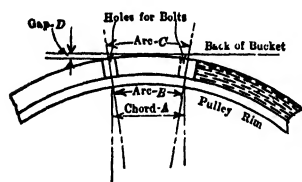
Double Row of Bucket Bolts Passing Over Pulley. (See Table 21-A.)
